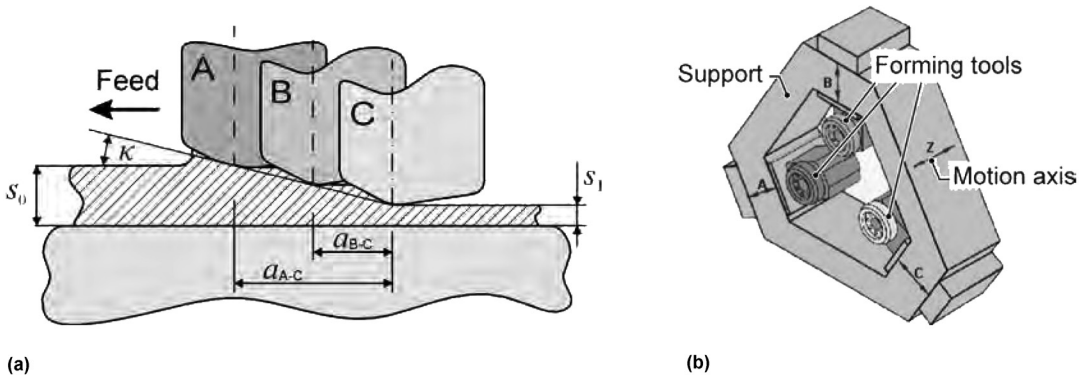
(a) Flow forming by three forming tools (illustrated in one cross section). Source: Ref 12.2. (b) Closed support design
